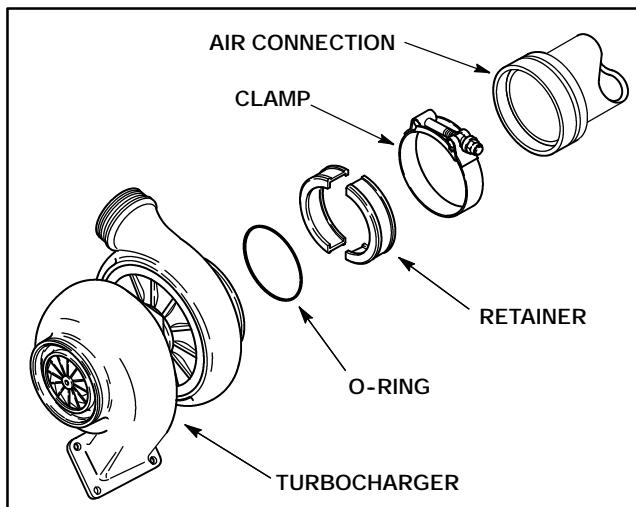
GLD/GSID Turbo Air Inlet Connection
